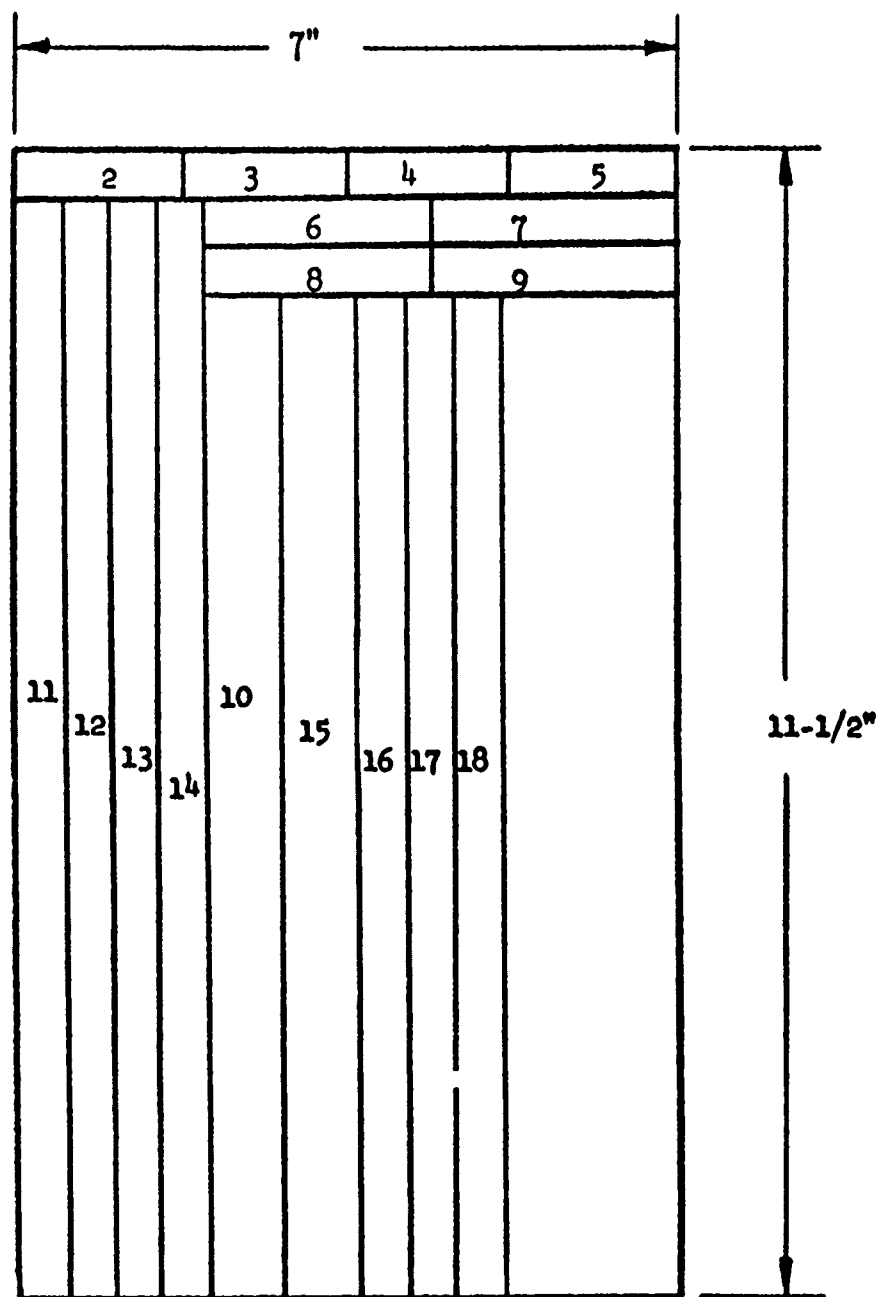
Test Specimen Cutting Plan - .050 Tungsten Sheet
